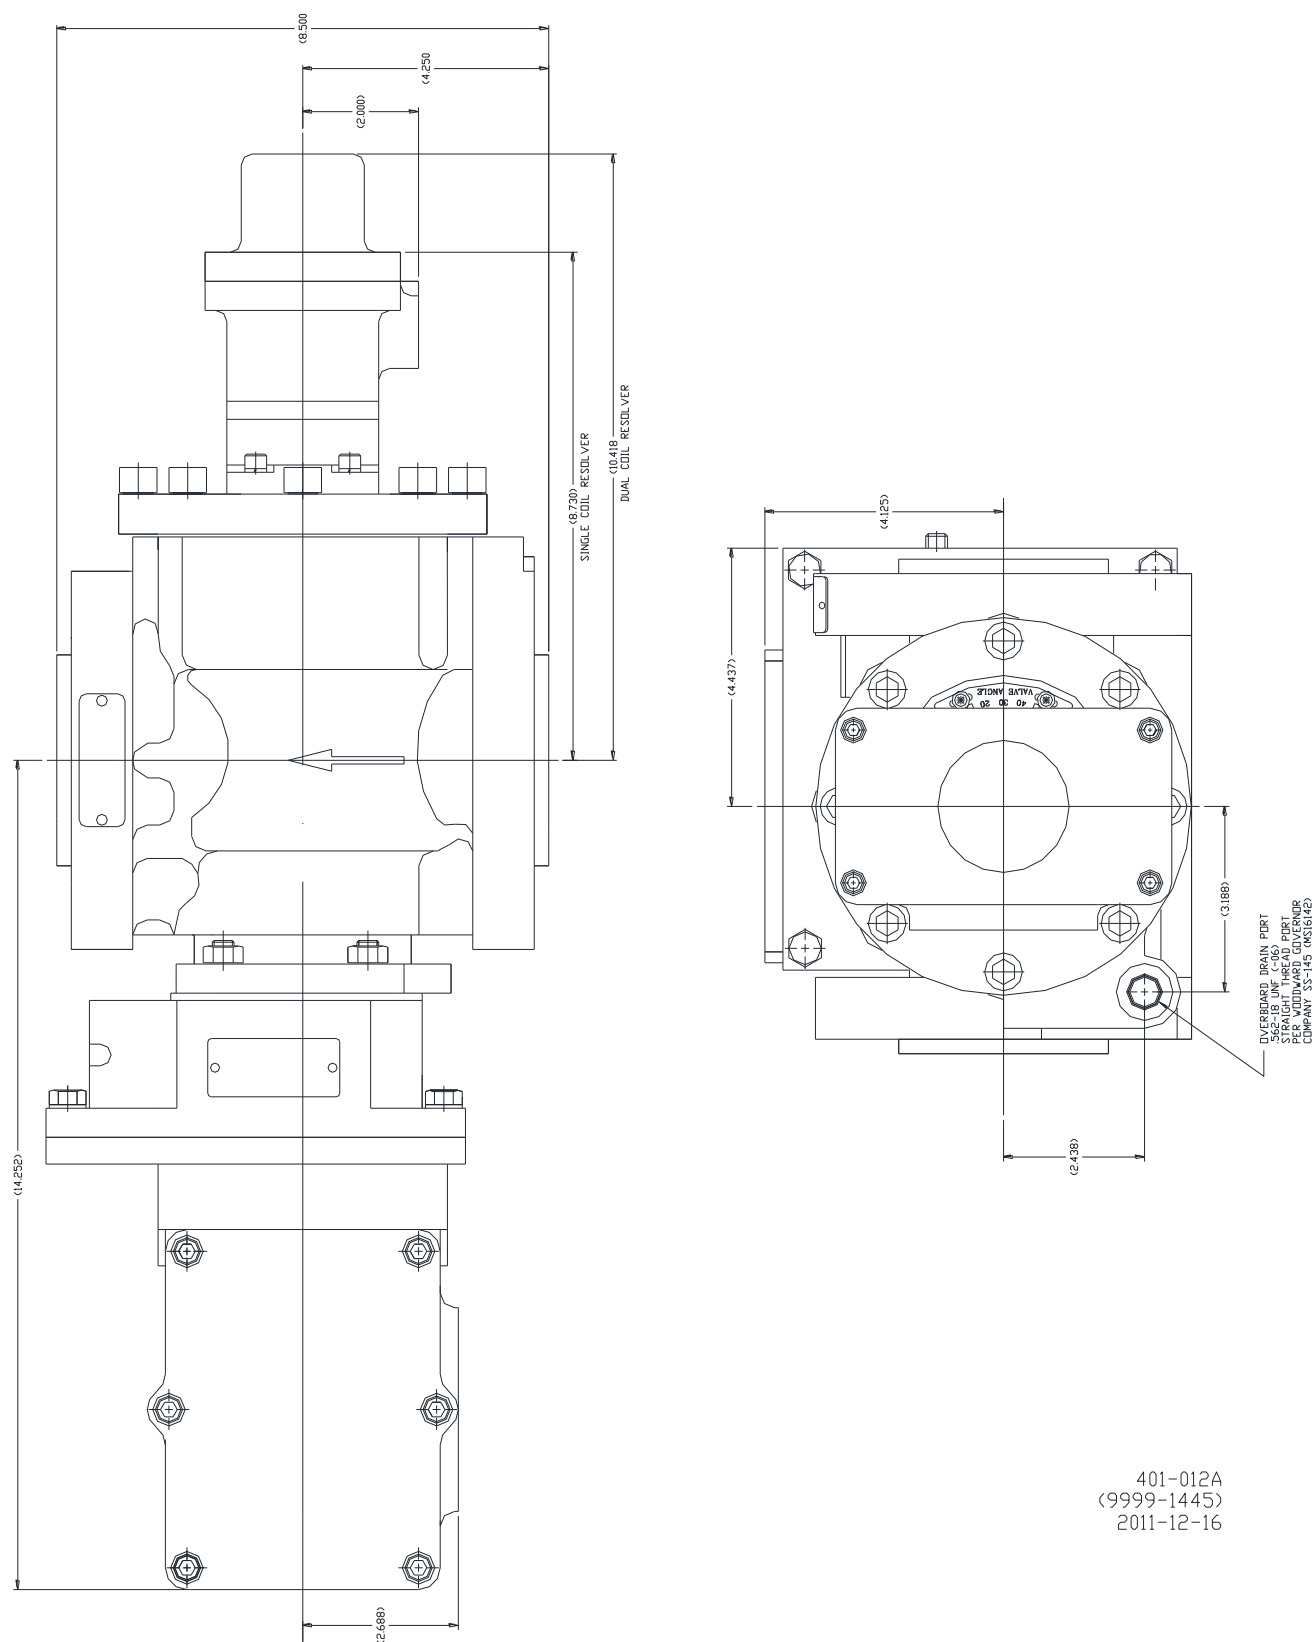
EM35MR Actuator/3103 Gas Valve 900 psig PED/Resolver Outline
